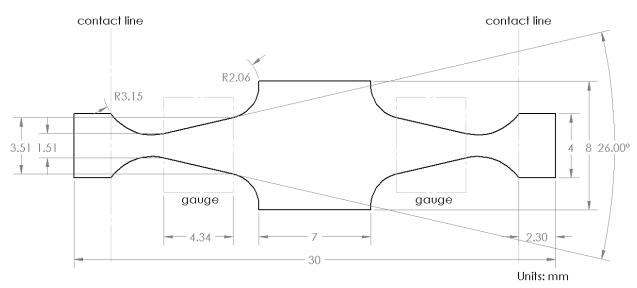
Drawing of the wedge-shaped Krouse type mini specimen showing the dual gauge section, and contact line at both ends for simply supported loading
